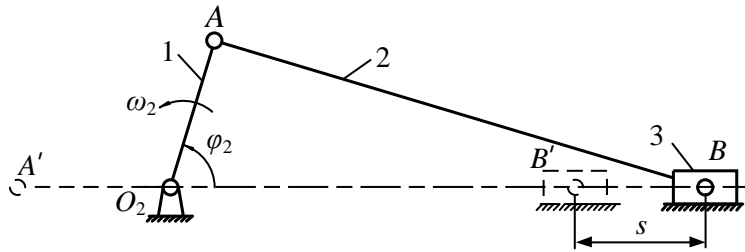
Diagram of crank slider: 1. Crank 2. Connecting rod, 3. Slider
